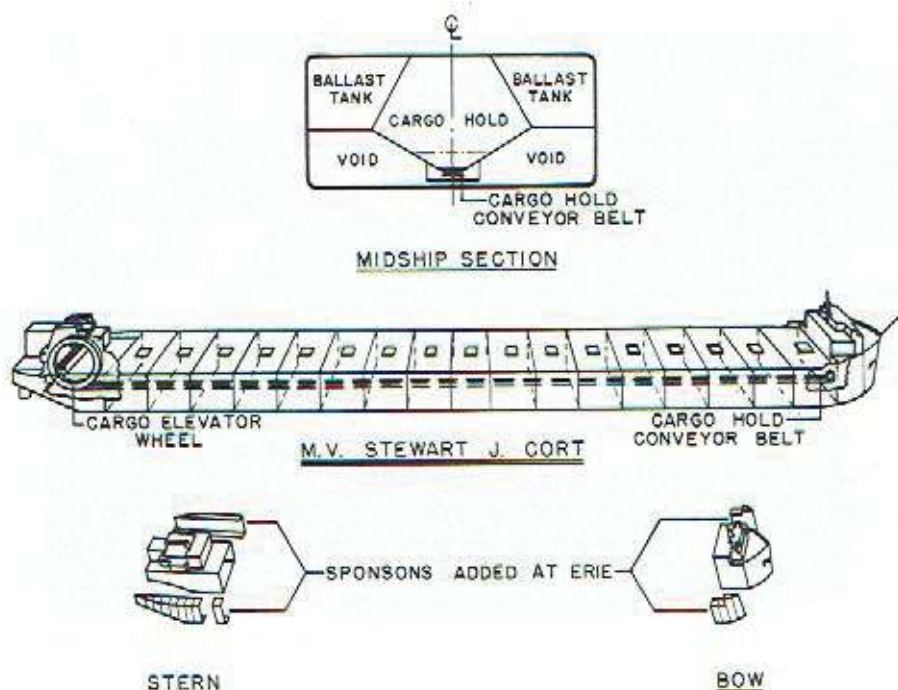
This isometric view of the M/V STEWART J. CORT shows the single cargo hold conveyor which carries cargo to the elevator wheel at the stern of the ship for transfer to the shuttle unloading boom.
